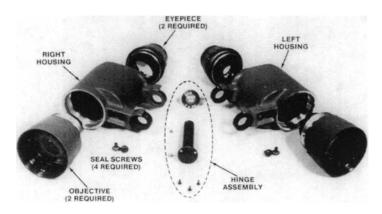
Exploded view of the modular military Binocular M19. (From a U.S. Army photograph.)
